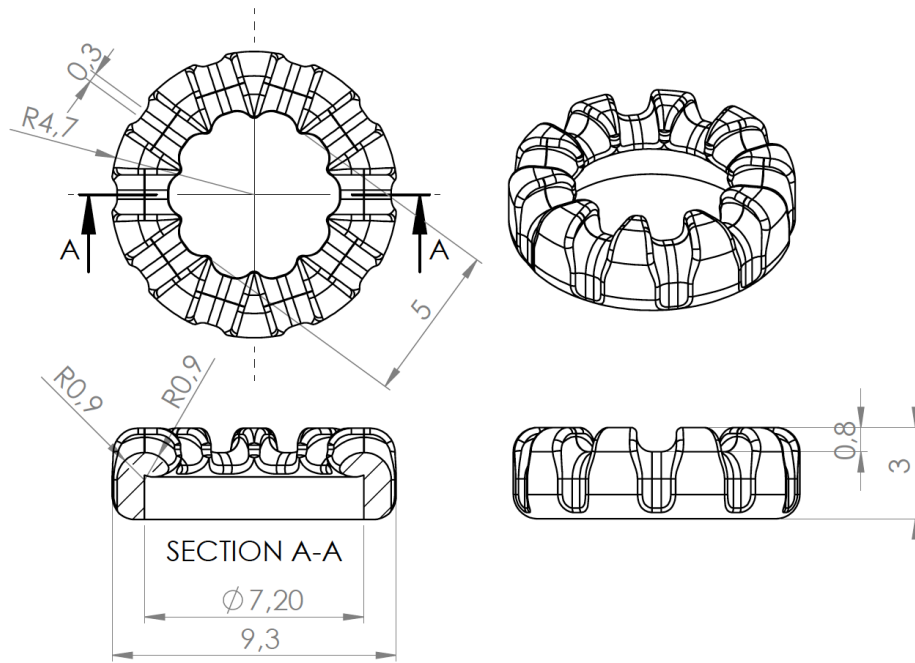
Selection of component views and dimensions (mm), C2 - Tip
